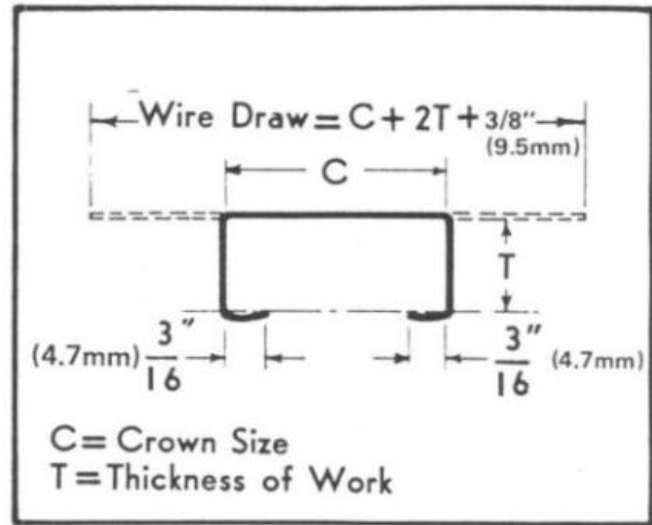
Wire Draw Dimensions and Formula for Crowns Greater than 1/2" (12.7mm)
